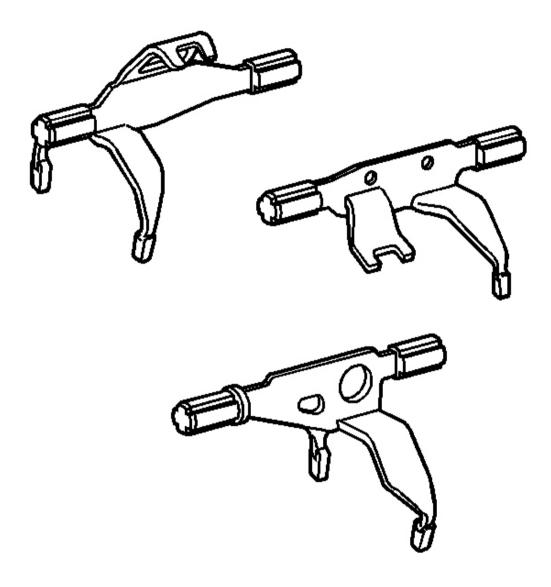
Inspecting Shift Forks, Shafts & Rubber End For Wear Or Damage Courtesy of GENERAL MOTORS CORP.
